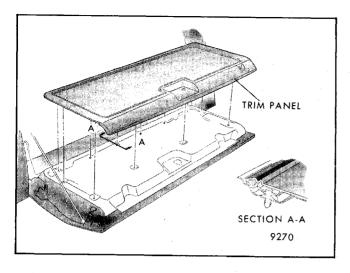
B-35 Tailgate Inner Trim Panel Removal
